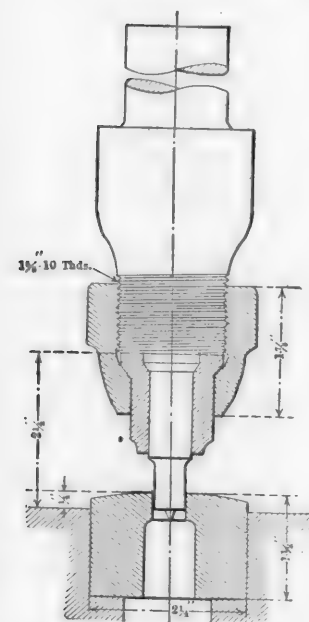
STANDARD REDUCING COUPLING AND PUNCH.
